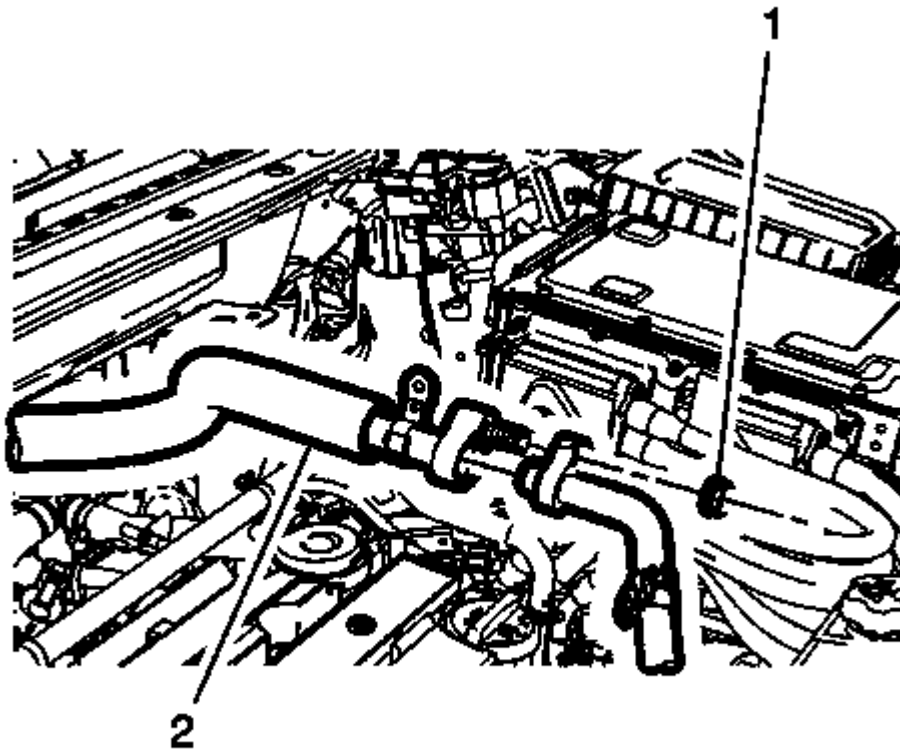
Air Conditioning Compressor And Evaporator Hose And Nut
